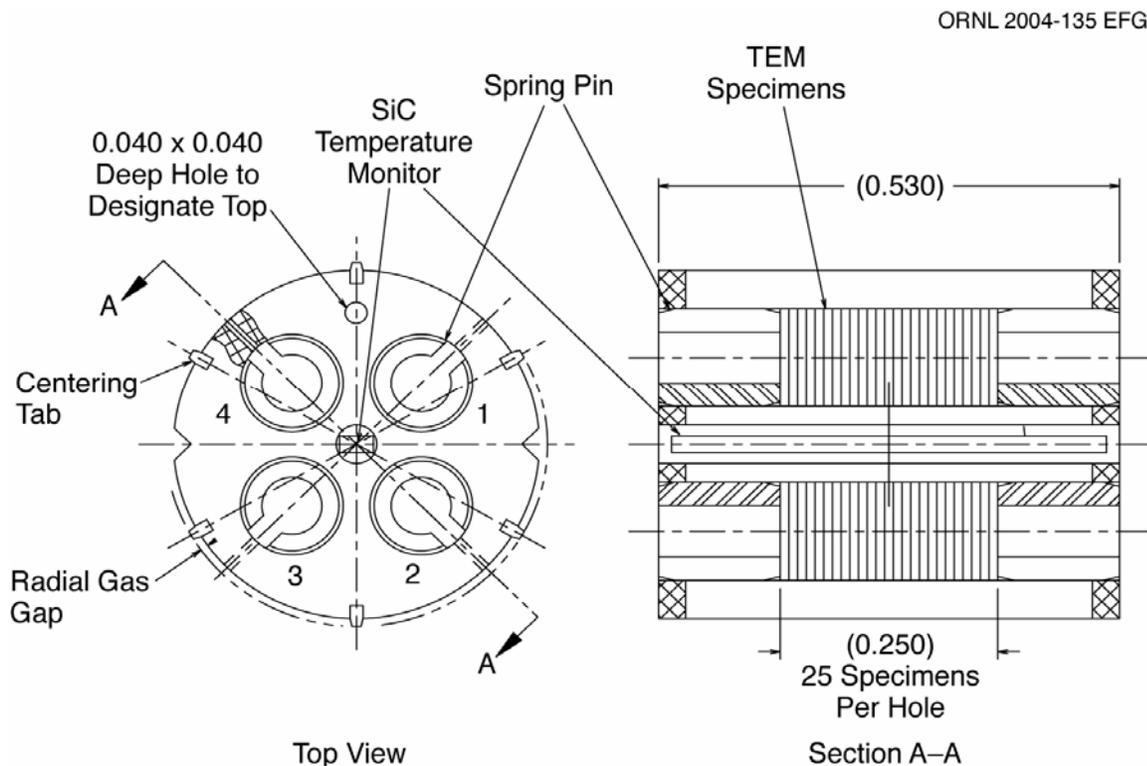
Specimen holder subassembly used in JP-27 for TEM specimens.
